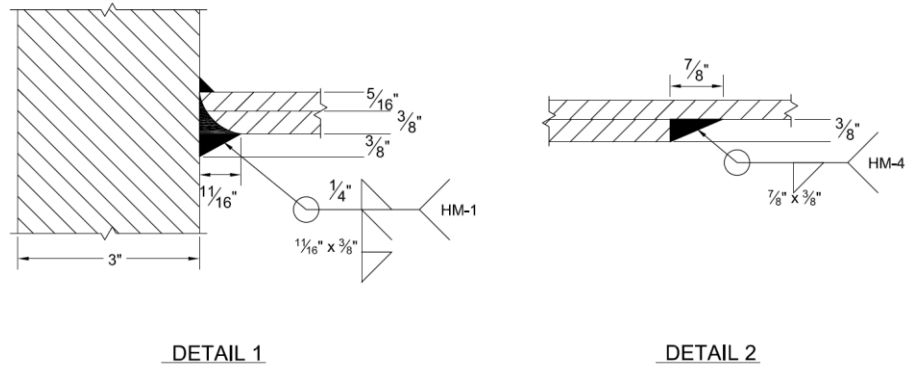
Weld details for baseplate and external collar, as called out in Figure 5-3
